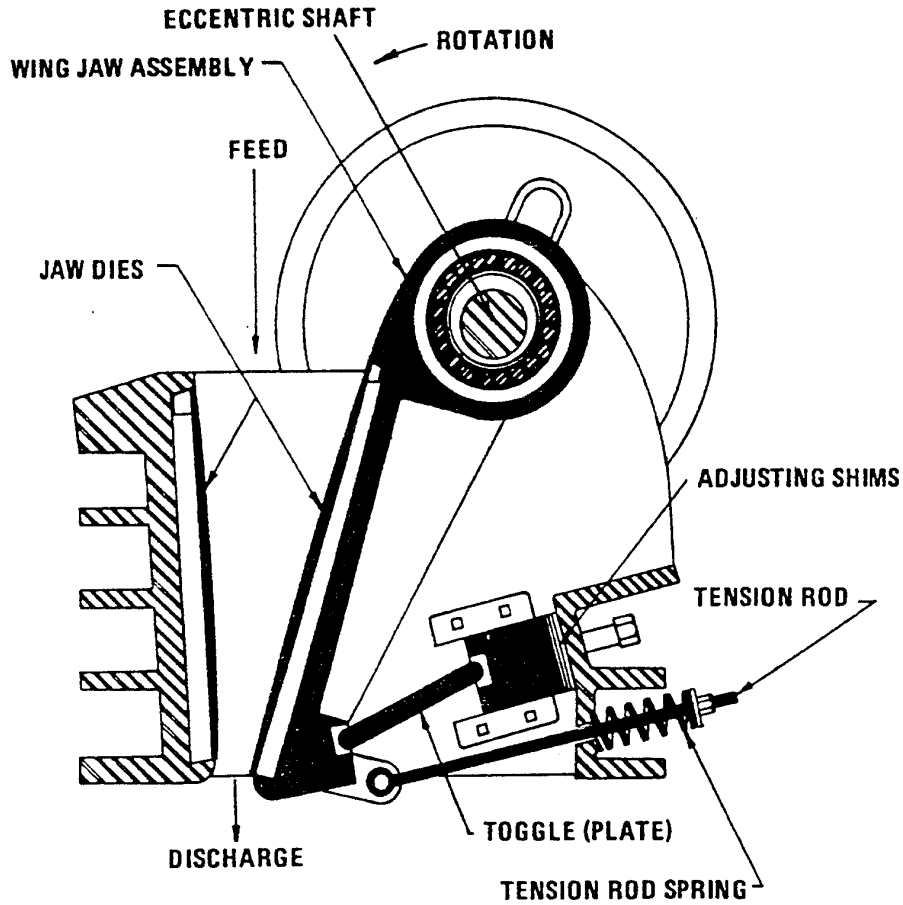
OVER HEAD ECCENTRIC JAW CRUSHER.
